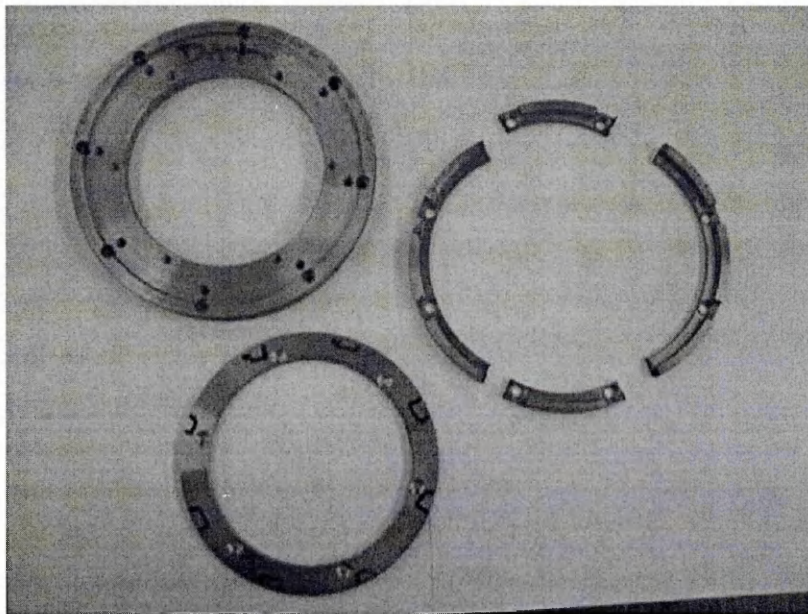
Segmented wheel, mounting ring and bolting ring
